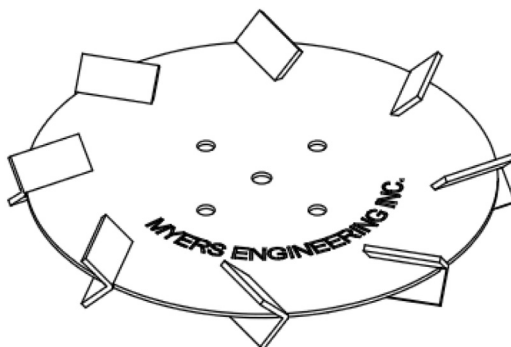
Radial pumper impeller design. Forward facing teeth accelerate product with minimal impact shear. *Courtesy of Myers Engineering, Inc.
